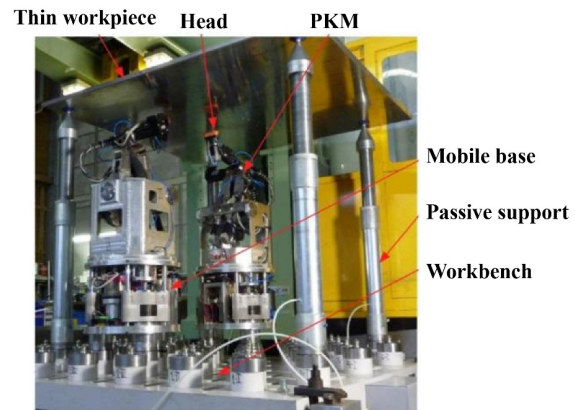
Mechanical-MRF composite fixture. PKM: parallel kinematic machine. Reproduced with permission from Ref. [49] from Elsevier.
